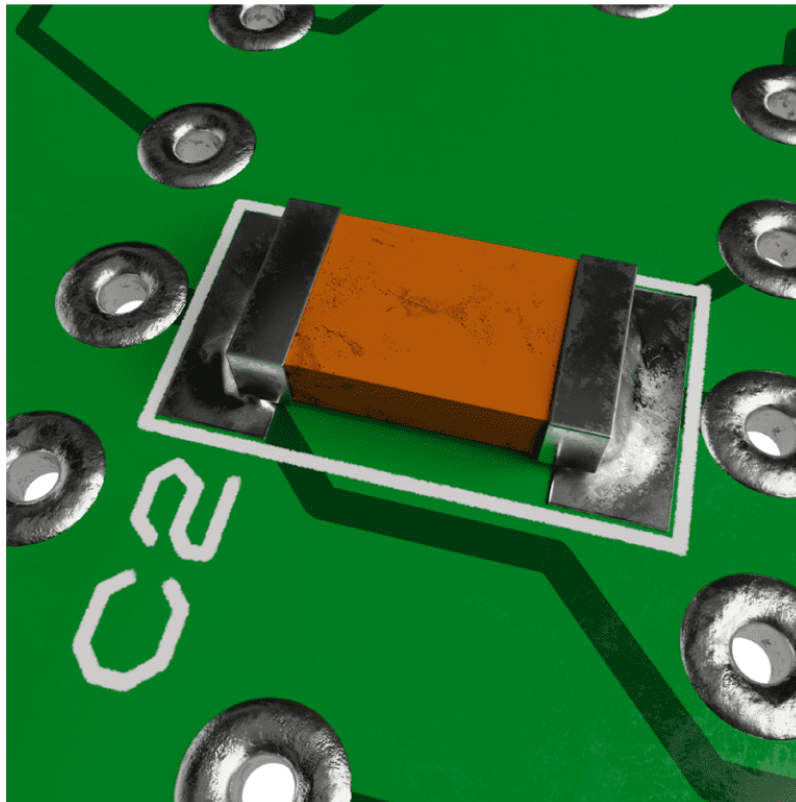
Ideal solder joint. (Source: IPC-A-610)
